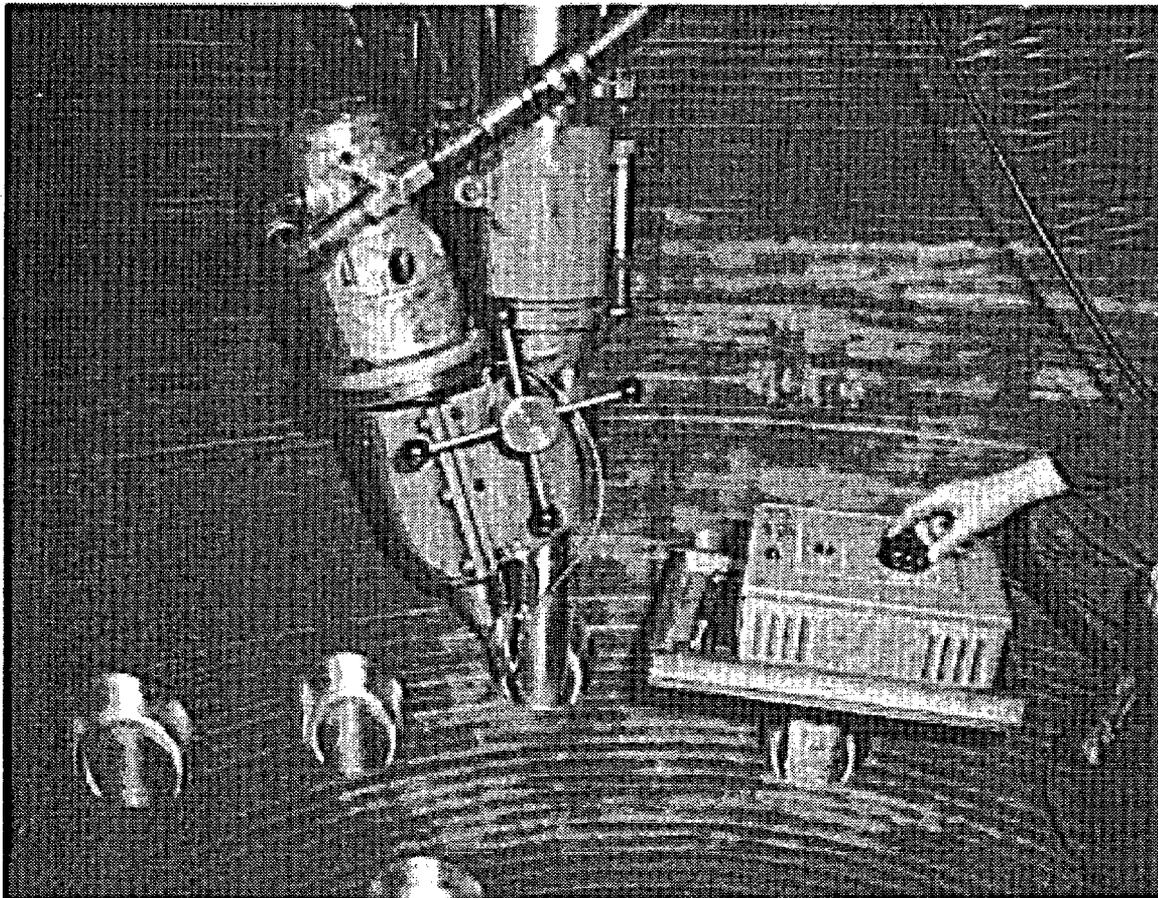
“Pogo Stick” Used to Machine J-Grooves in RPV Closure Head for CRD Housing Penetration Tube Partial Penetration Welds
